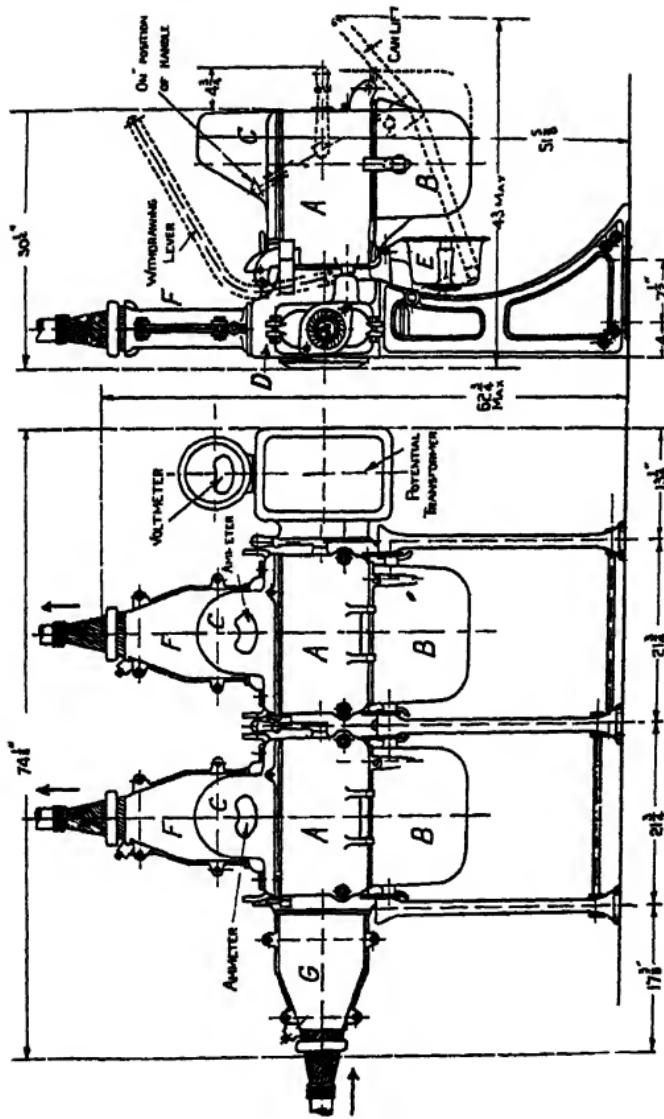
Outline drawing of B.T.-H (Type O) "draw-out" switchgear. *A*, switch body; *B*, oil tank; *C*, cover; *D*, bus-bar chamber; *E*, cover for connection sockets; *F*, trifurcating cable box for outgoing cable; *G*, trifurcating cable box for incoming cable.
